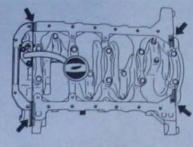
Apply sealant to the shaded areas of the block sealing face
